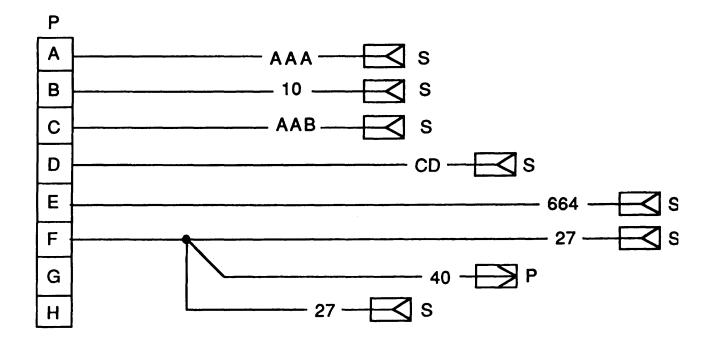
Hydraulic Control Gage Wiring Harness (12333555)
